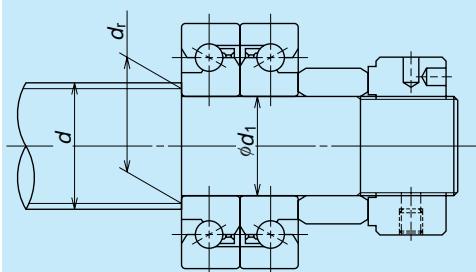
Support bearing and end face (shoulder) for installation
